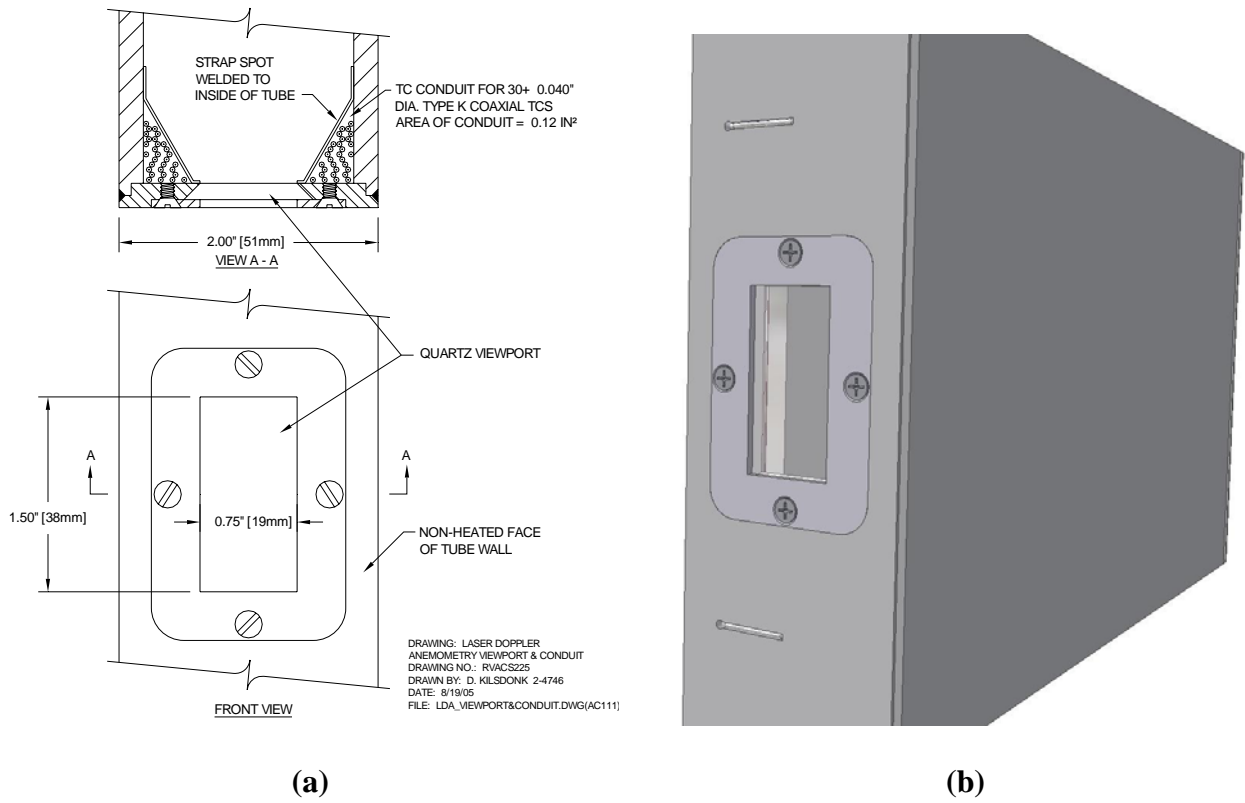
(a) Fabrication Details of the Thermocouple Conduit and LDA Viewports, and (b) 3-D Rendering Showing the Exterior View of the Viewport.
